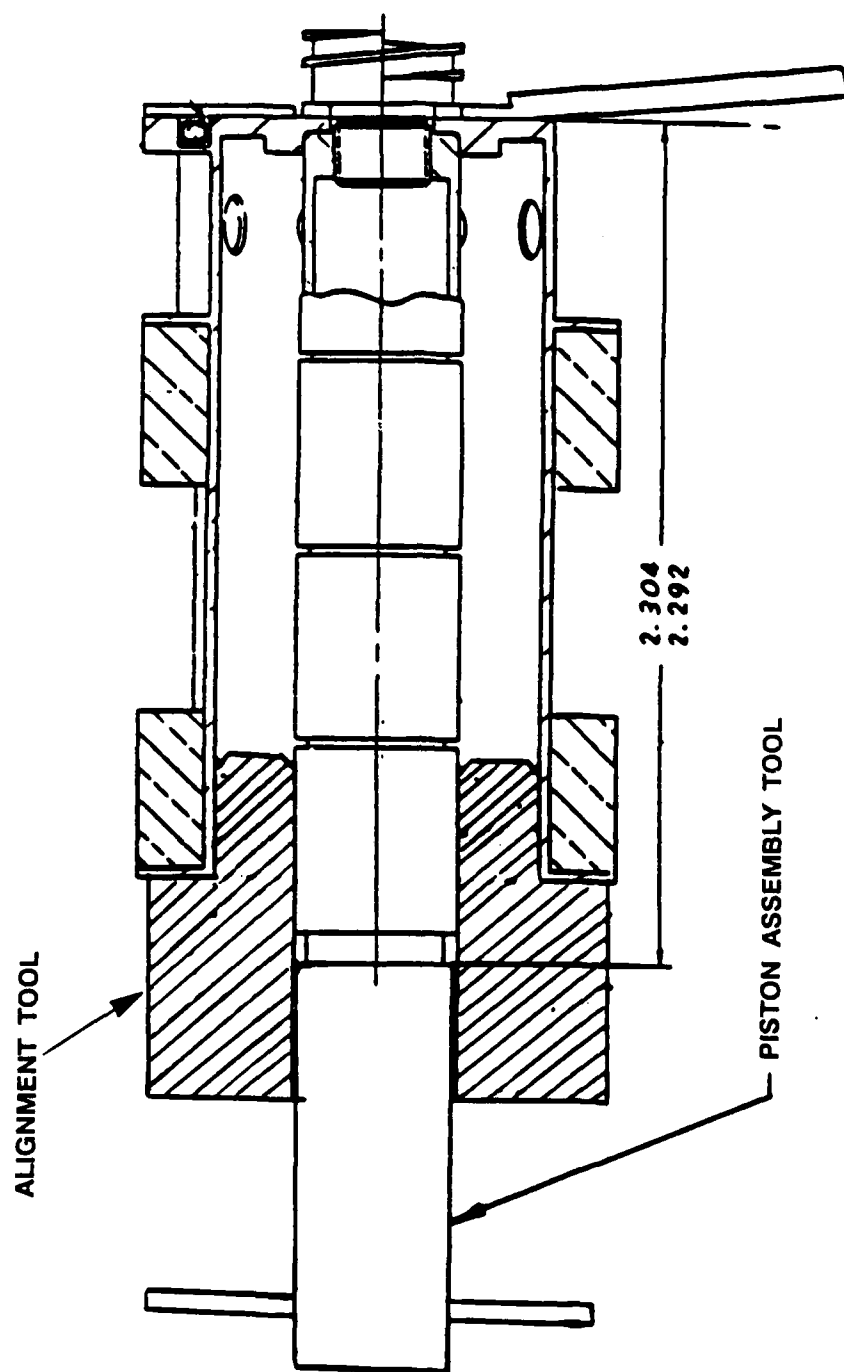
Piston Coil Assembly with Alignment Tool in Position
